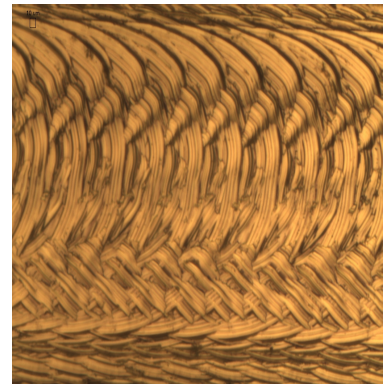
Cutting surface of workpiece by optical micrographs(feed rate 200 mm/min, spindle speed 3000 rpm, cutting depth 0.3 mm and ball endmail)
